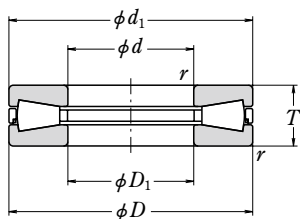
Thrust Tapered Roller Bearing in Heavy Duty Extruder
